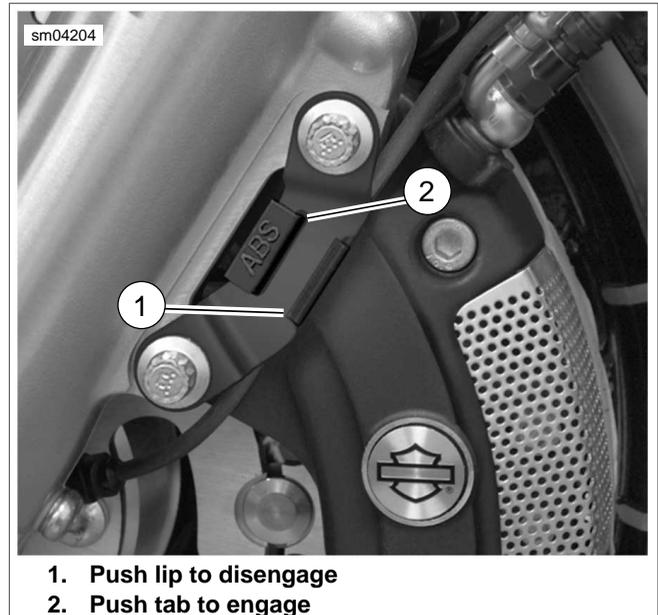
Front Wheel Speed Sensor Cable Clip (ABS Equipped)
